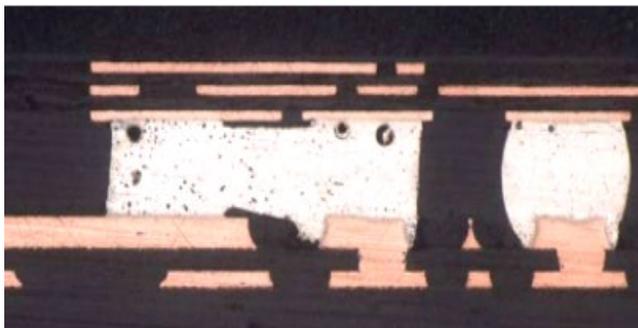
Example of solder bridge between soldermask-defined and non-soldermask-defined BGA pads.
